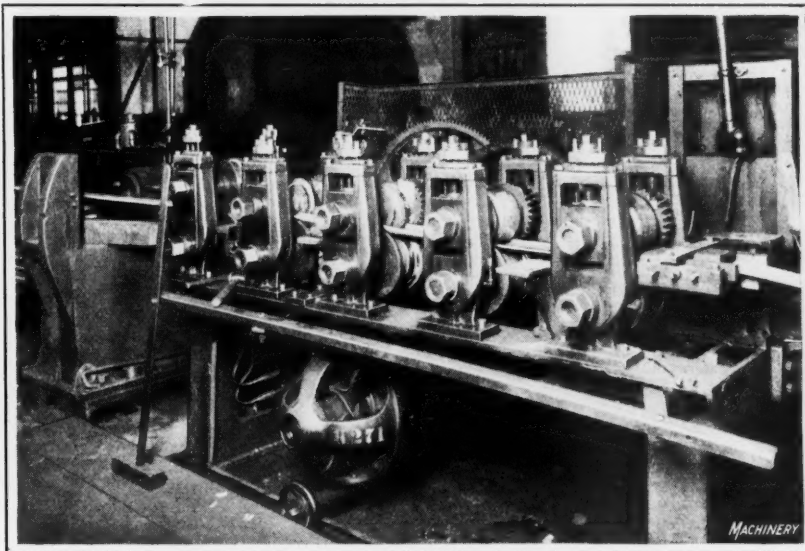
Rolling the Strip Stock into Tubes in a Machine equipped with a Series of Rolls
